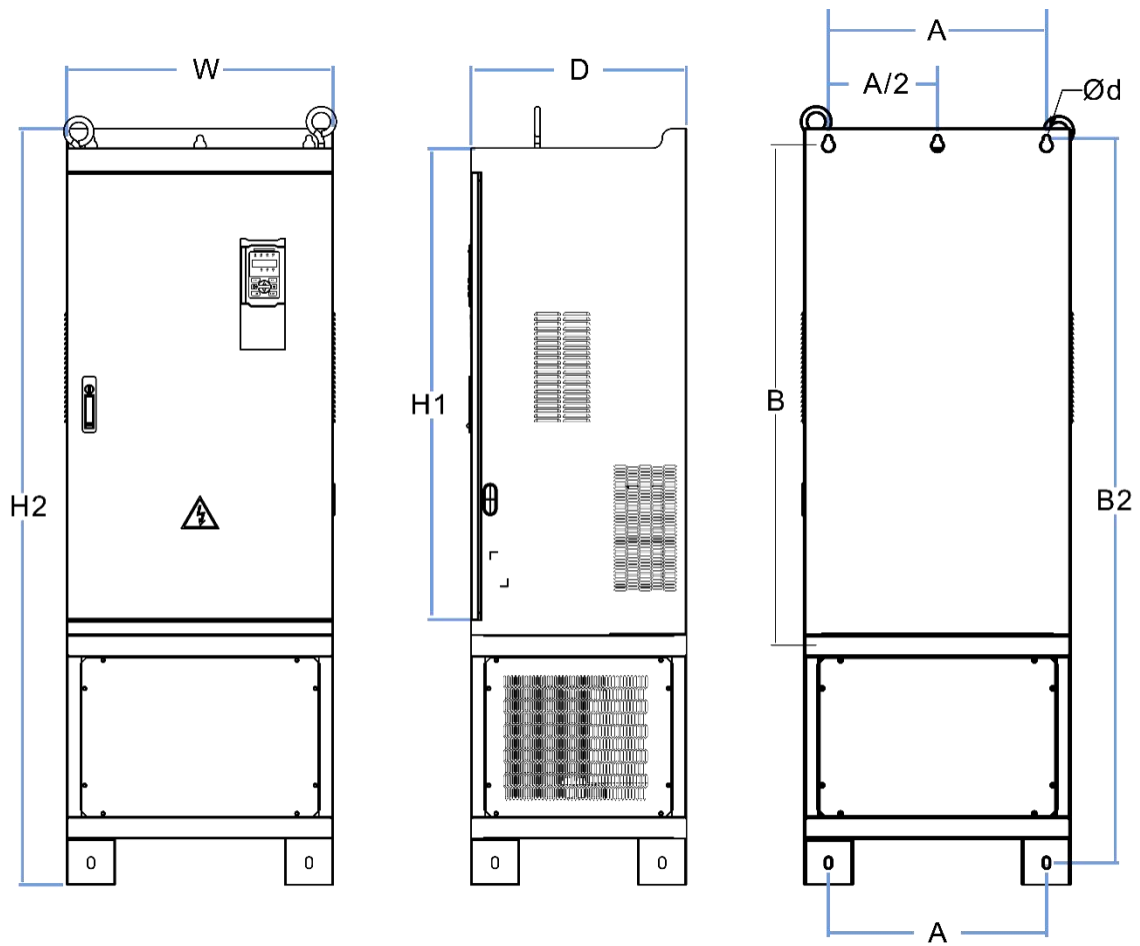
SIZE K~J(280KW-315KW) Dimension
